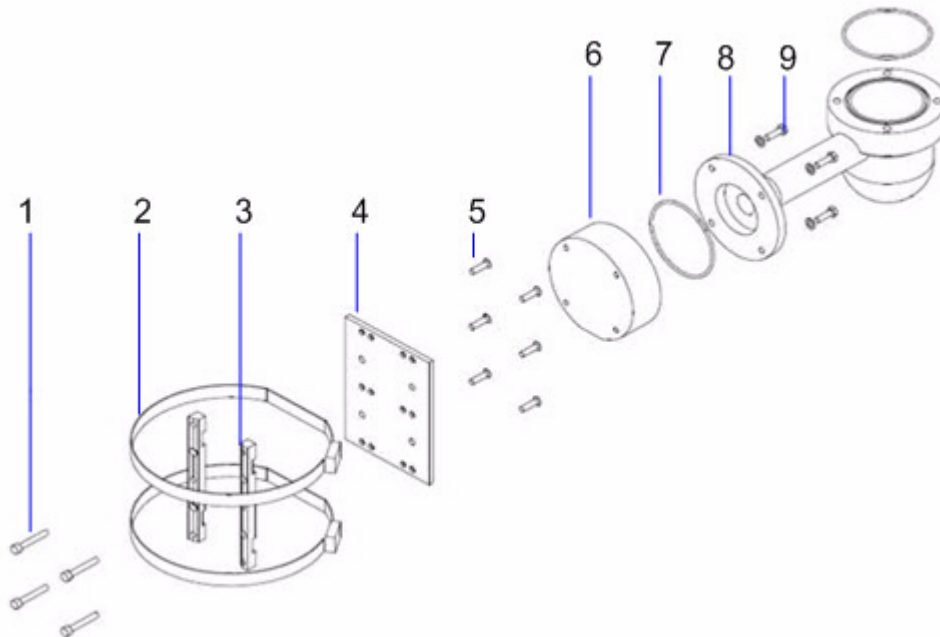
Typical pole mount (from left to right: Pole Mount Bracket (MIC-PMB), Shallow Conduit Adapter (MIC-SCA), and Wall Mount Bracket (MIC-WMB))
